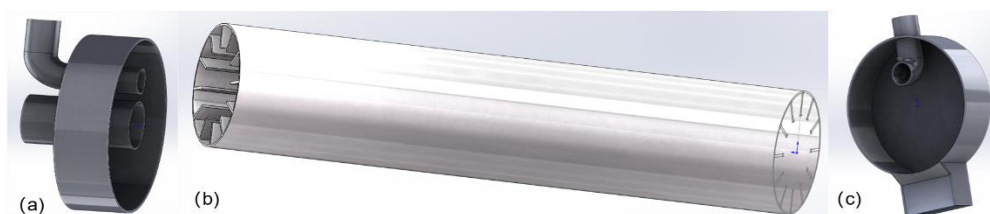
Geometric model of drum drying machine (a) the front chamber (b) cylinder body (c) rear chamber of the drum respectively.
